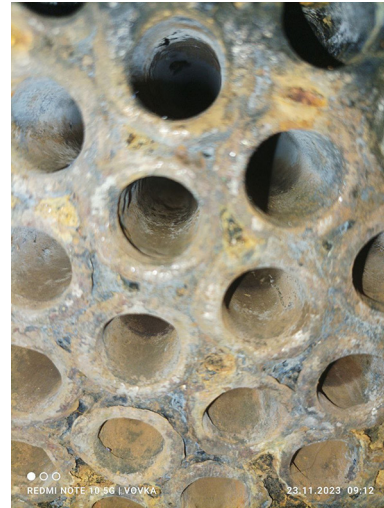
Photograph of the internal surfaces of the heat exchanger tube bundle before cleaning
